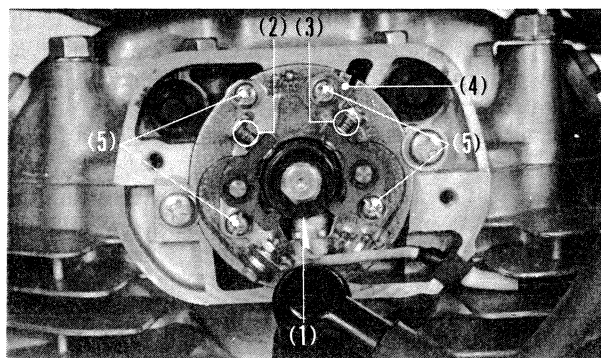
(1) Point cam (5) Contact breaker plate locking screw
